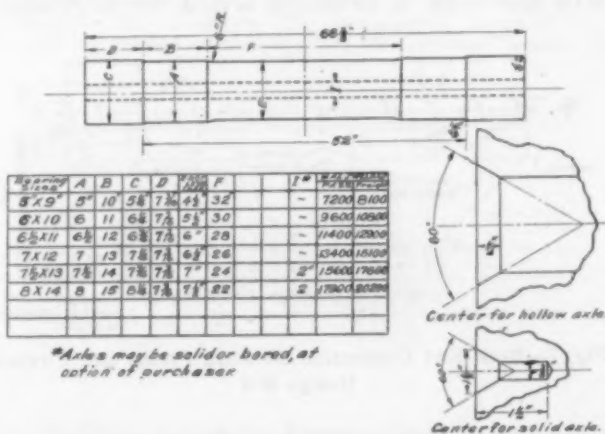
Sizes and Dimensions of Recommended Engine Truck Axles
